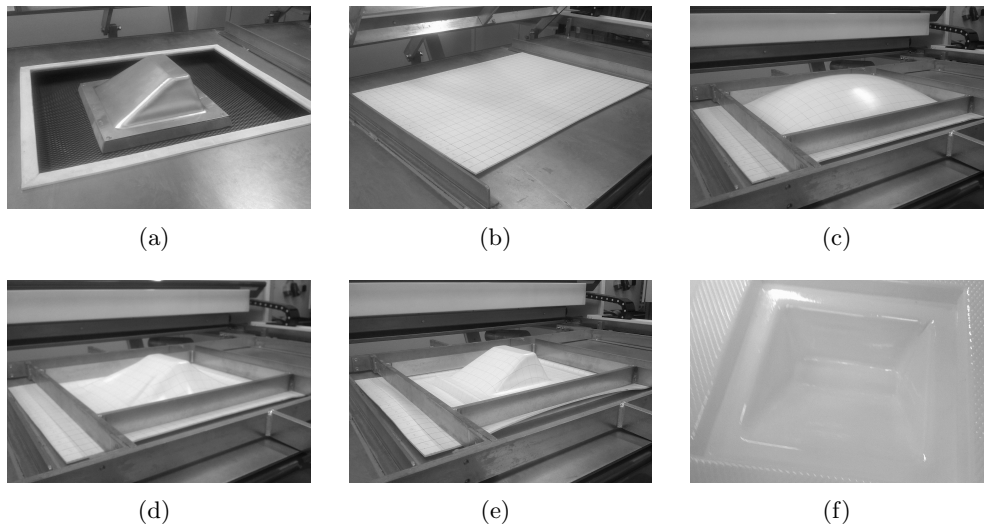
Thermoforming with SPIF sheet metal moulds using HIPS
